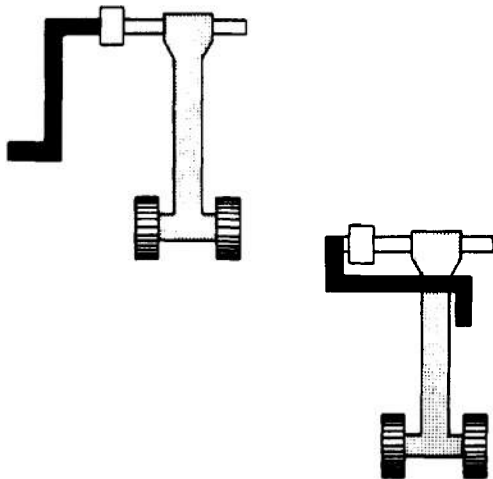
Design Folding Handles on Trailer Landing Gear (Ref. 1)
